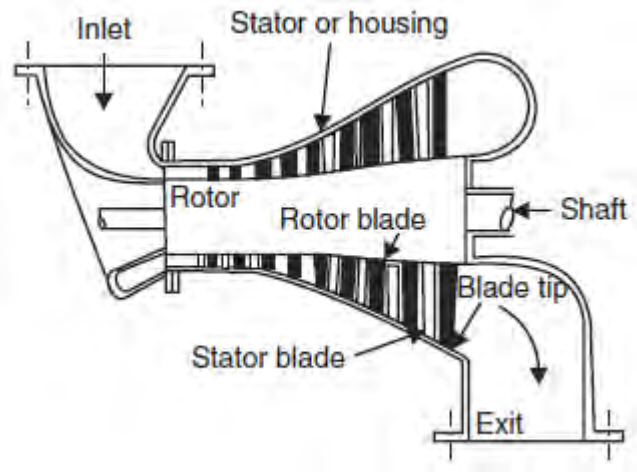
Schematic cross-sectional view of a turbine showing the principal parts of the turbomachine (Chima, 1978).
